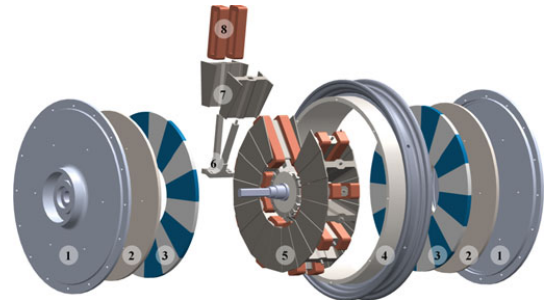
Schematic of the SAT PMBLDC in-wheel motor (1. End cover, 2. rotor yoke, 3. magnet poles, 4. wheel rim with spacer, 5. stator, 6. tooth holder, 7. segmented tooth, and 8. coils).
